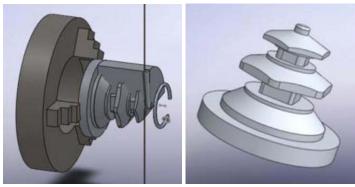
Axially symmetric part setup and finished geometry machined using WEDM-RP.
